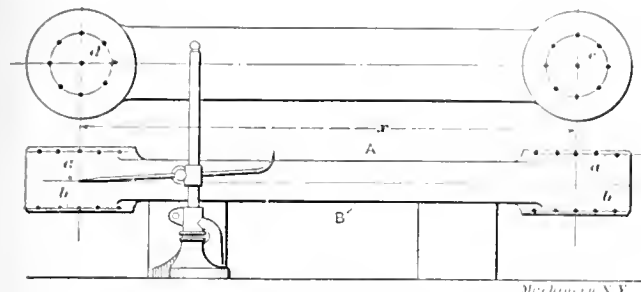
Example of the kind of Work that is given a Preliminary and a Final Layout
